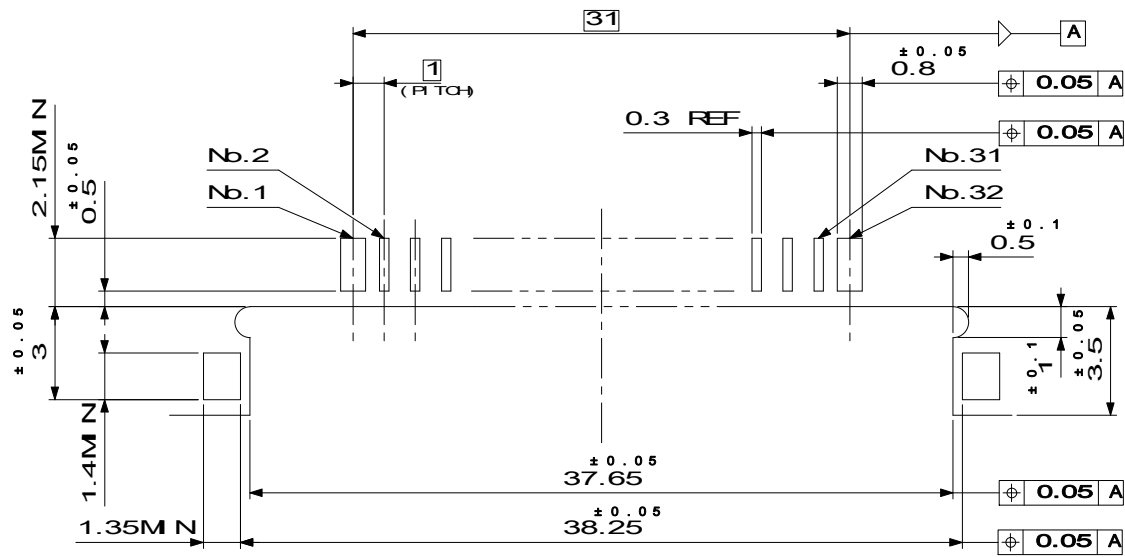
Panel-side Internal PCB Mount Receptacle Connector (in unit of mm)
